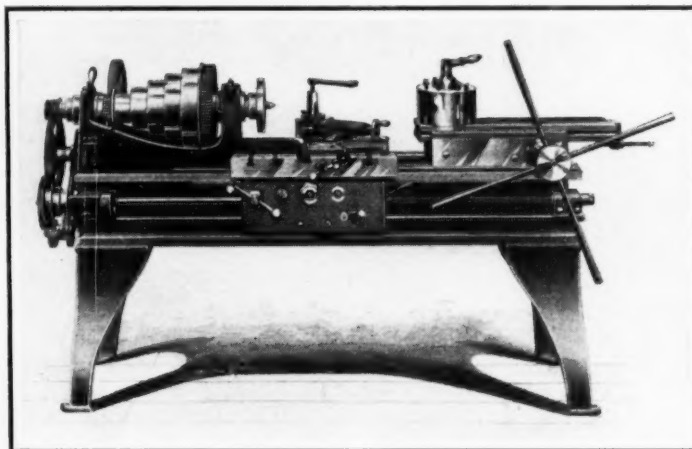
An 18-inch Turret Engine Lathe Brought out by the Springfield Machine Tool Co. Just a Little More than Forty Years Ago. It was Especially Designed for Heavy Duty
